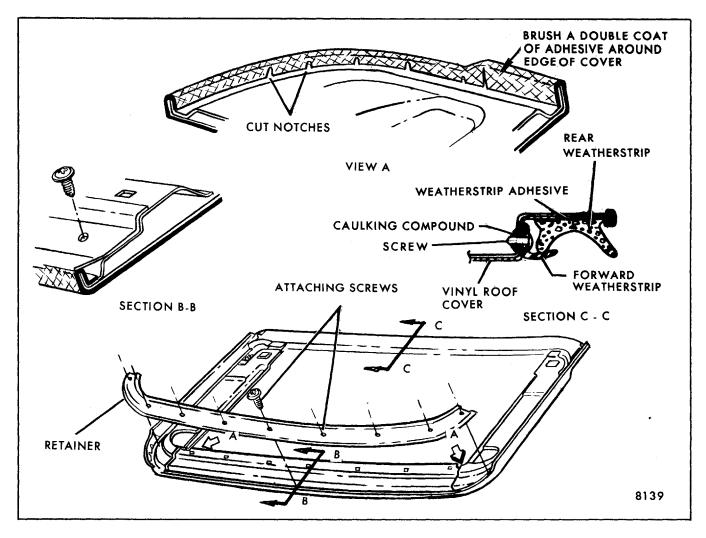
Fabric Roof Cover Installation on Sliding Sun Roof Panel (CA1 Option)
